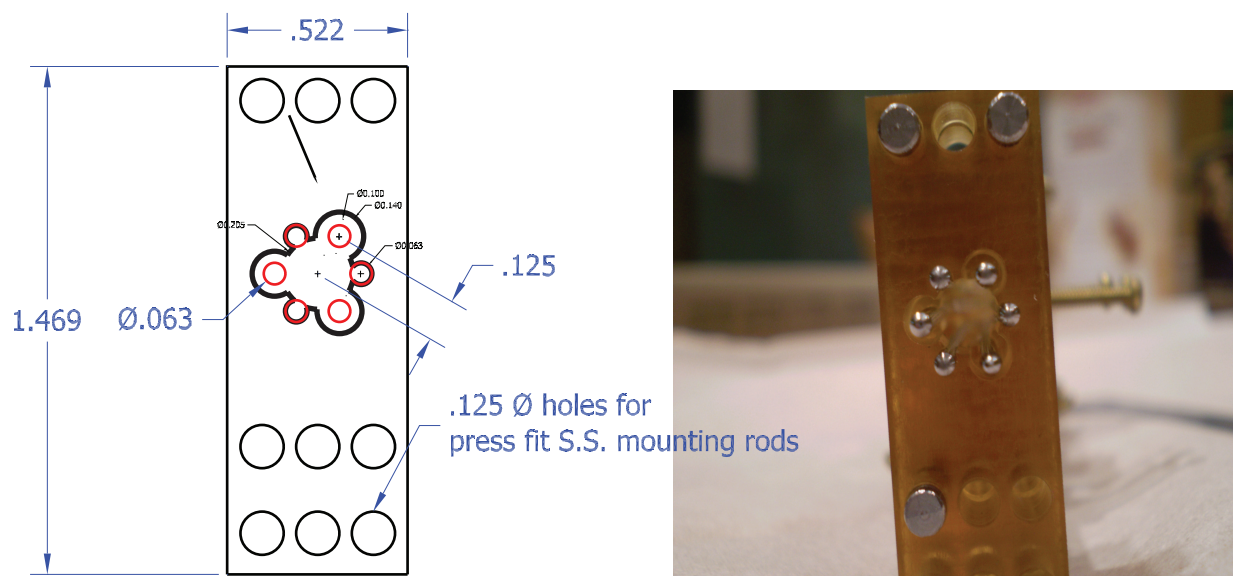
One of the ultram alignment pieces used for the electrostatic guides of chapter 3. The red circles mark the locations of the 316 SS welding rods used as electrodes. These pieces are mounted in pairs, with each piece holding only the +6000 V or grounded rods; this was an effort to reduce surface currents that was, in retrospect, probably unnecessary.
